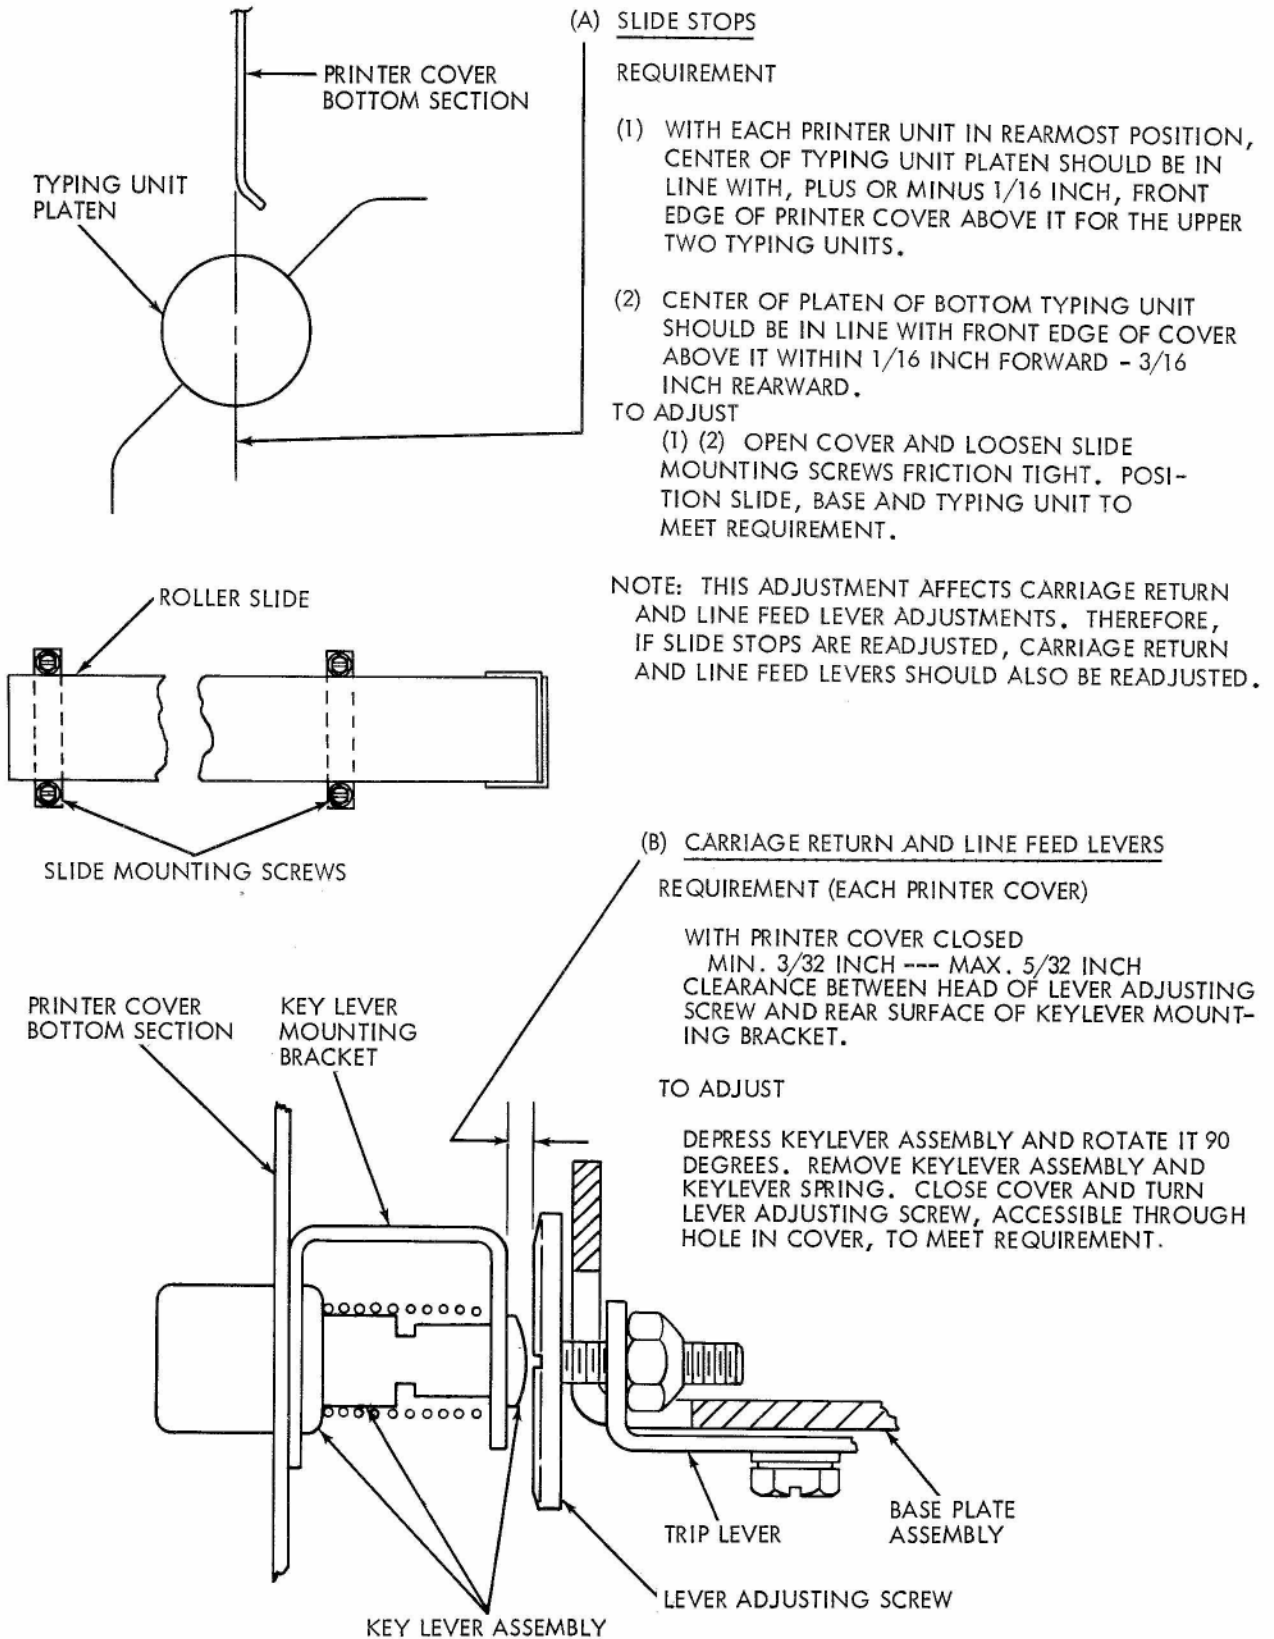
CABINET, FOR MULTIPLE MOUNTING PAGE PRINTERS
